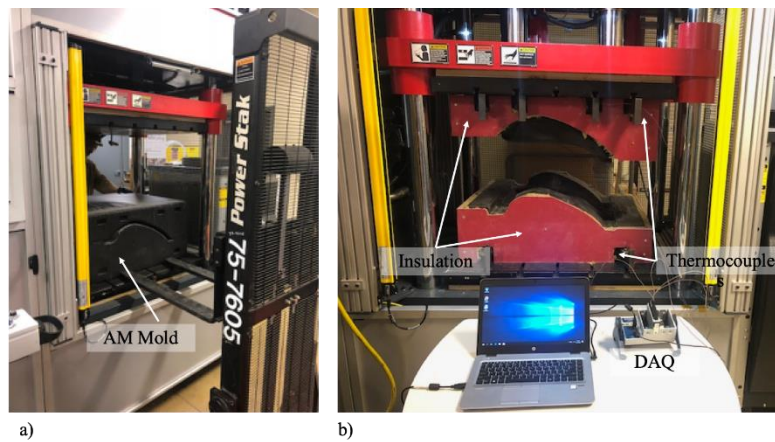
(a) Loading the AM seat back mold to the press using a forklift, and (b) AM mold with integrated insulation; multiple thermocouples were placed into the mold in different locations in order to monitor the molding surface temperature
